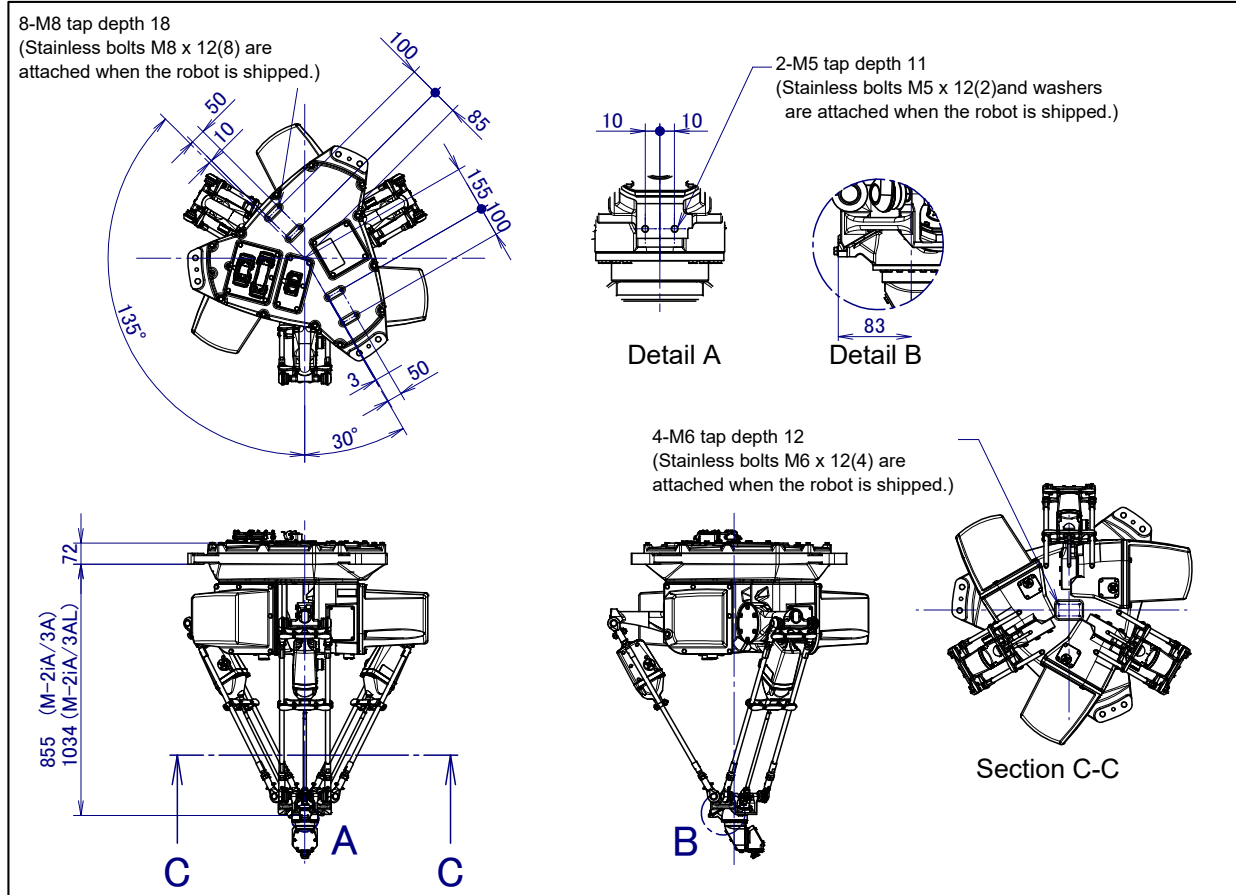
(b) Equipment mounting faces (M-2iA/3A/3AL)
